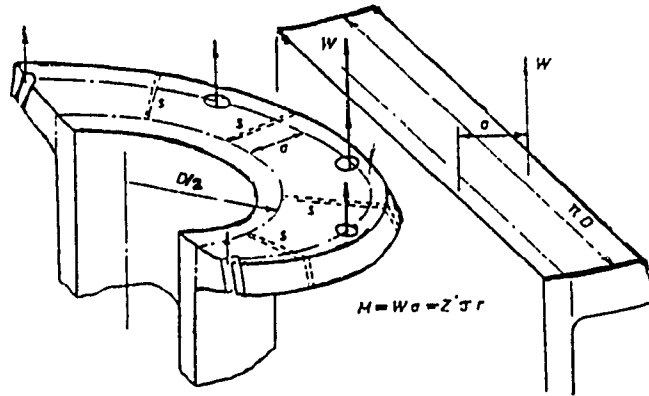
Beam Theory & Flange Design (Bach [1] & Crocker [3])
